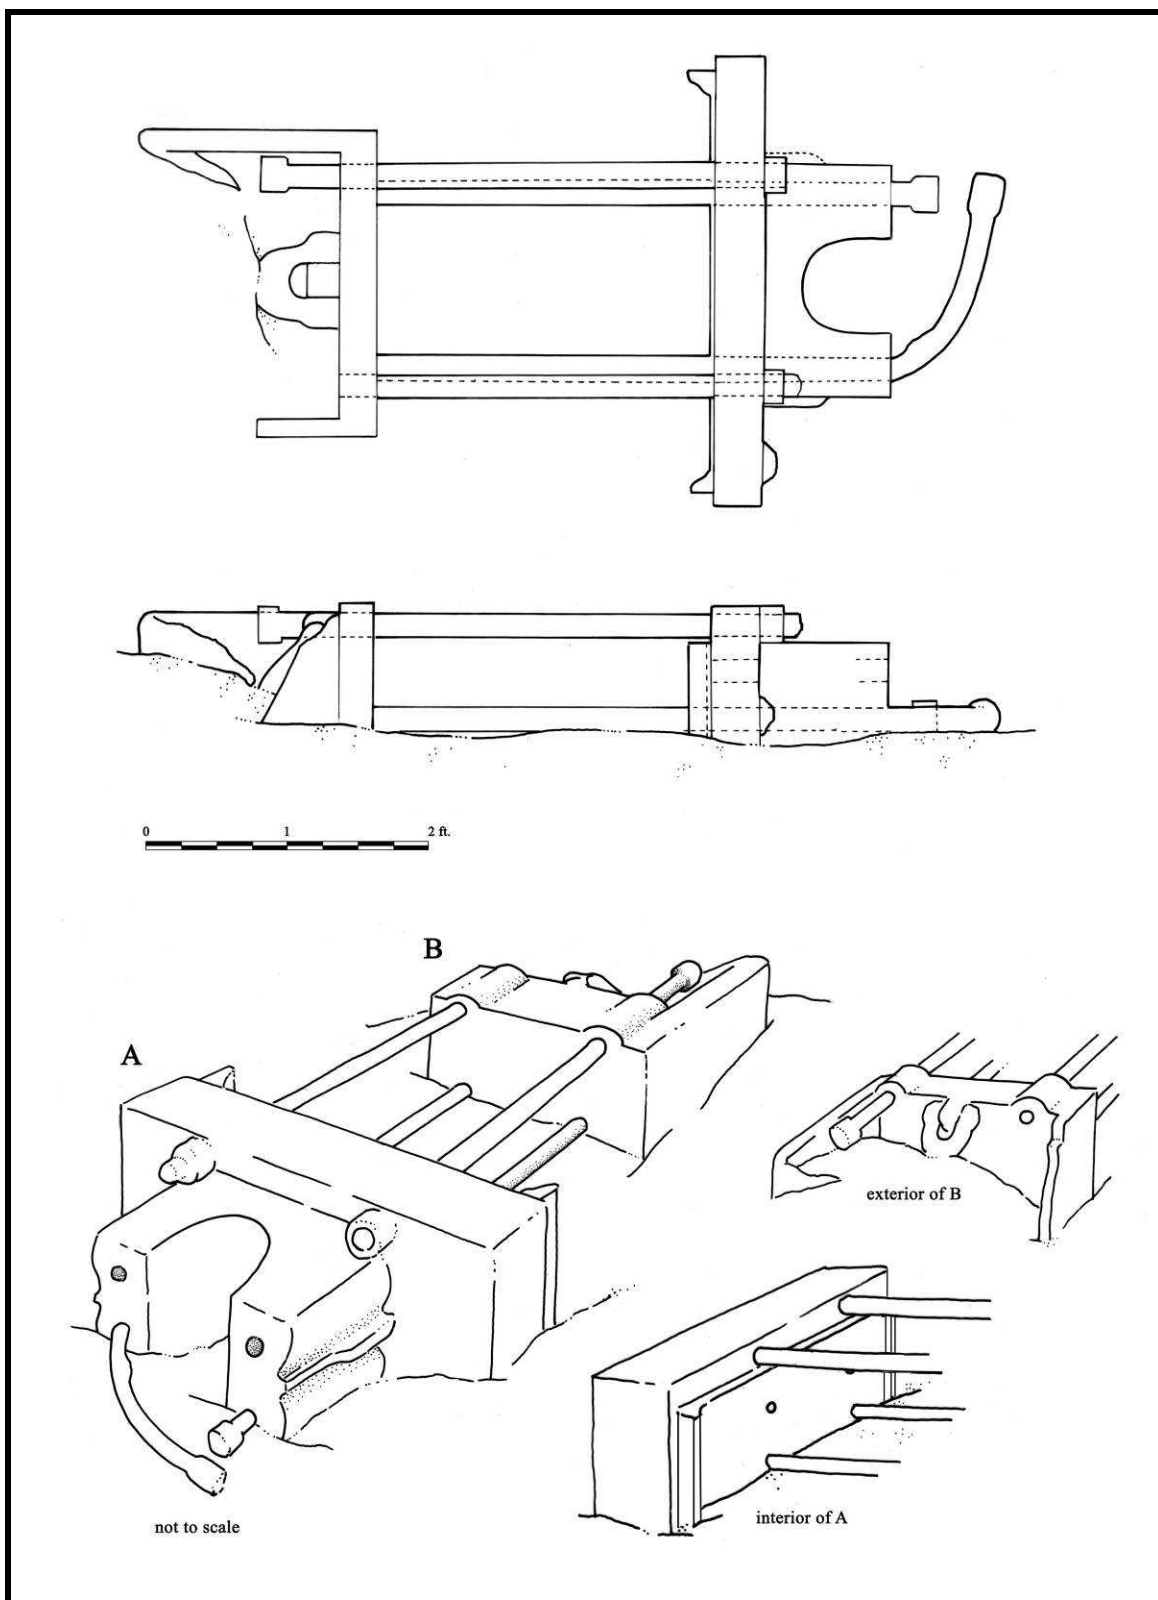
BEARING BLOCK (DRAWING BY AMY BORGENS)
